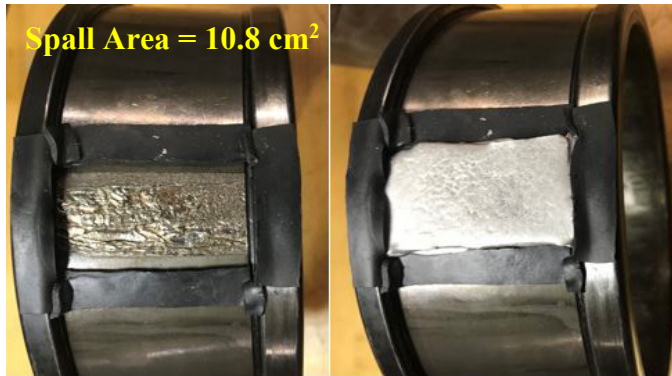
Spall casting procedure; (left) spalled surface outlined with tacky tape; (right)
